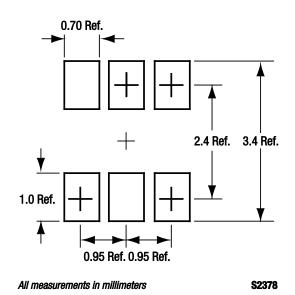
PCB Layout Footprint for the SKY12324-73LF
